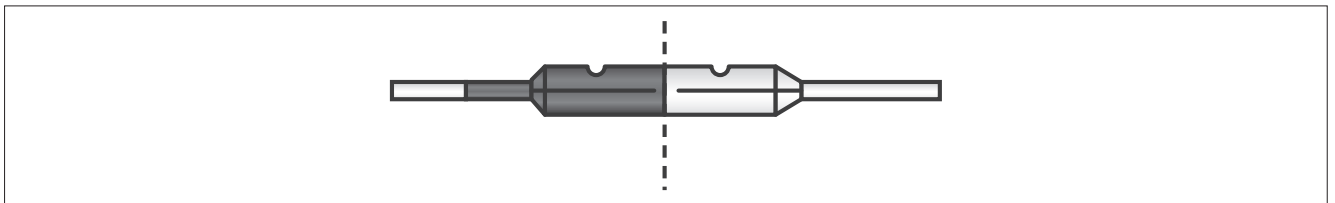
A view showing the BS-SRA heat-shrink tube over the BS-QU crimping ferrule
